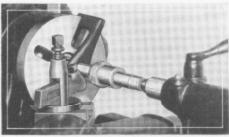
Cutting a Screw Thread on a Bushing The 9-inch South Bend Lathe is equipped with change gears and lead screw for cutting all standard screw threads. See handbook "How to Run a Lathe" for information on thread cutting.
